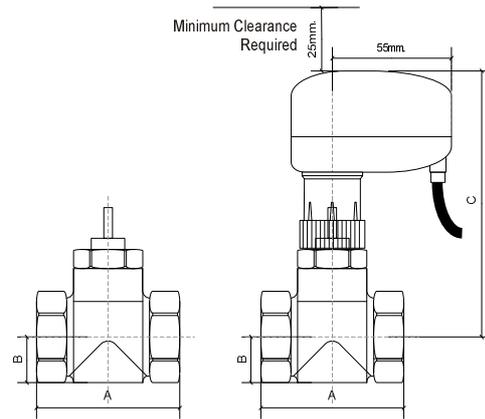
VA-7450 Actuated VG4000 Series Valve Dimensions, in. (mm) (Refer to Table 4)
